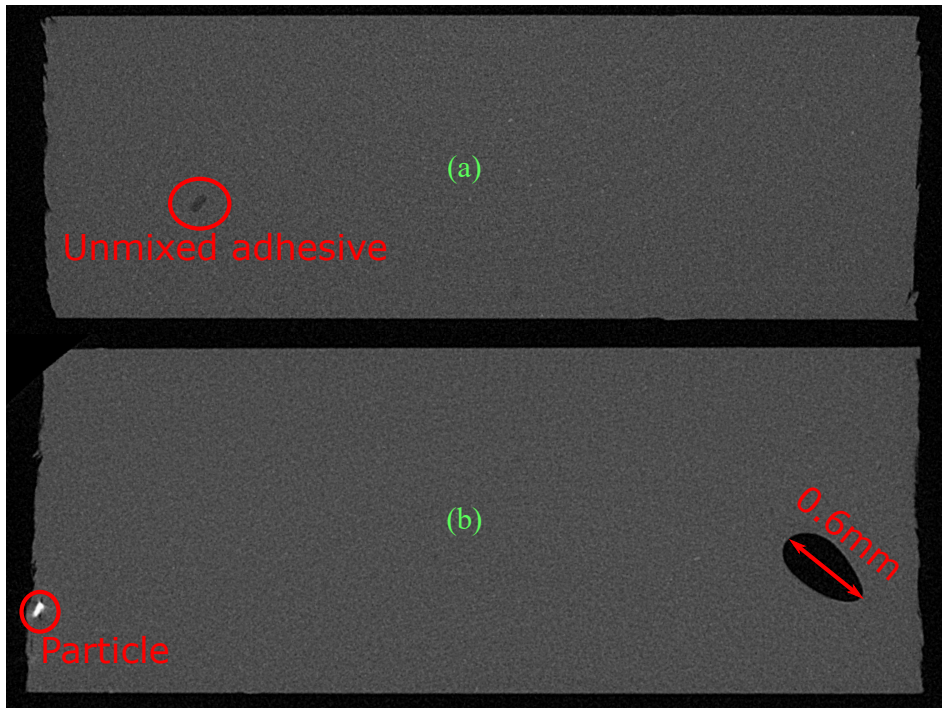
Examples of cross-sections obtained from computed tomography scans of 3 uniaxial tension test specimens. (a) A typical cross-section with a spot that has a similar density to unmixed adhesive. (b) View of critical cross-section, showing the only void found from these scans.
